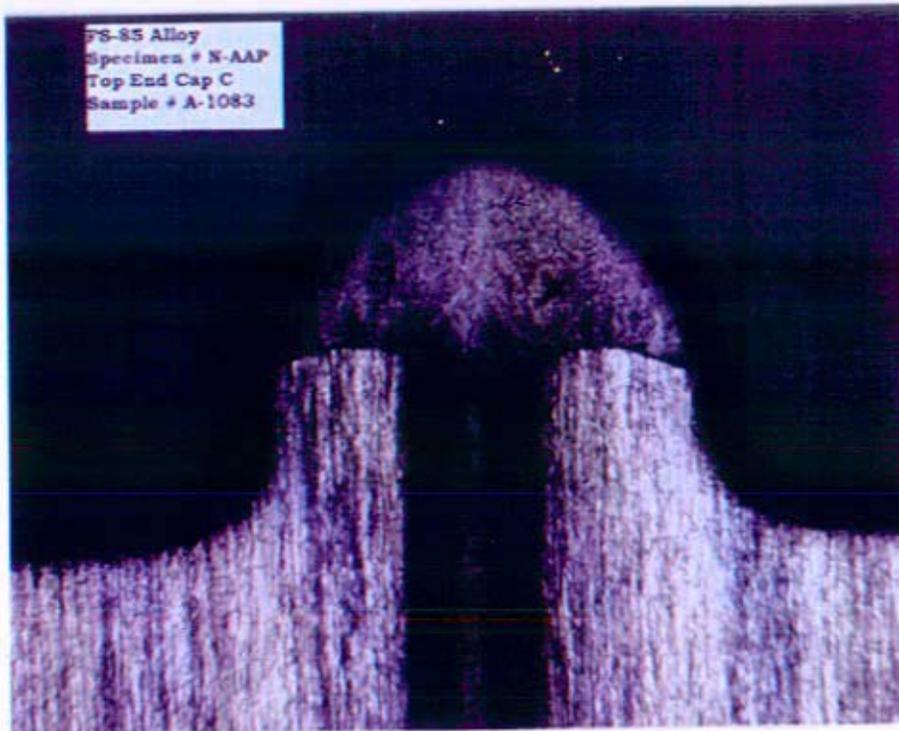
Typical convex laser weld shape in FS-85 (70x)
